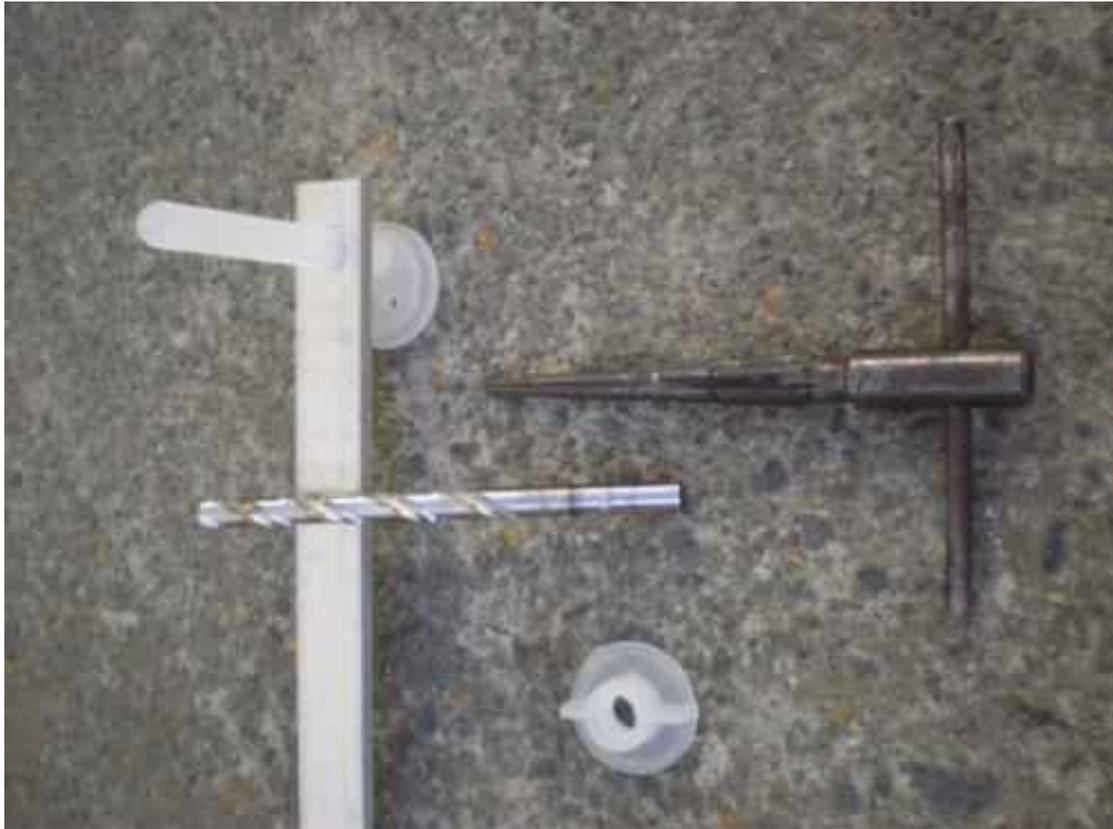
Nylon bolt and nut. The bolt is epoxied to the hull. If your largest drill is too small a reamer can be used to enlarge it. Cut the excess length of plastic bolt off after fitting. The bolt is a toilet seat retaining bolt.
